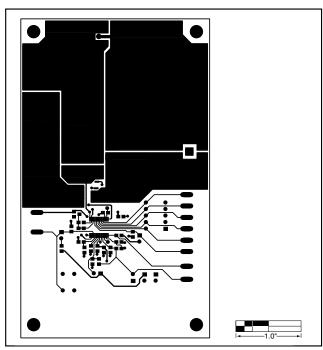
MAX1855 EV Kit PC Board Layout—Component Side
